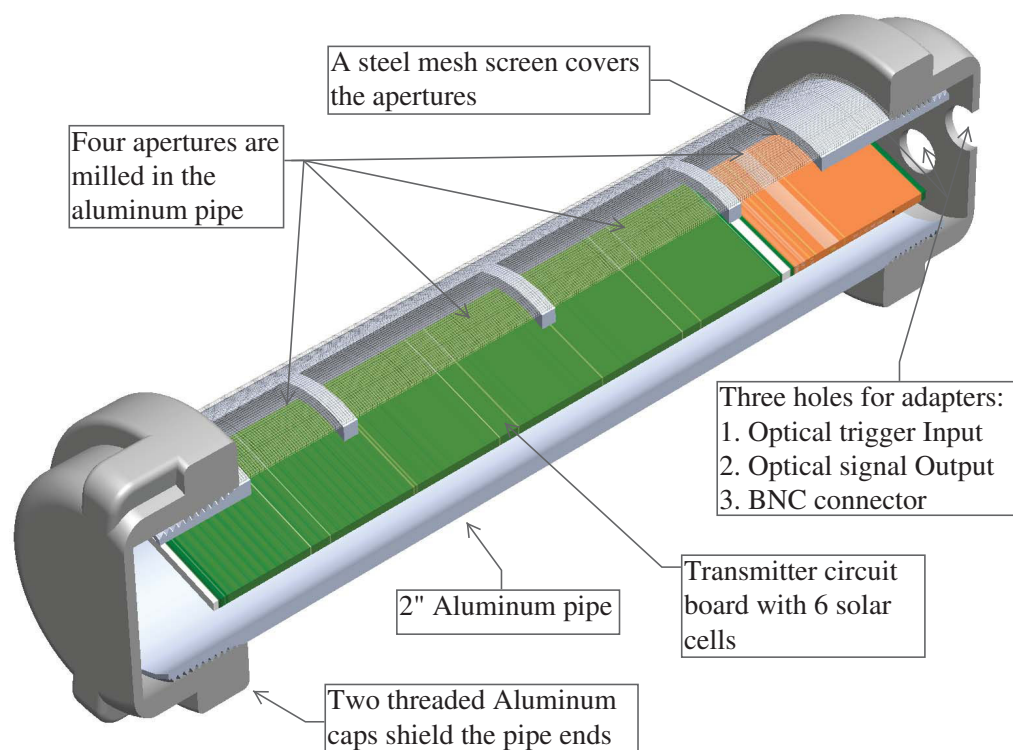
Three dimensional cross-section drawing of the transmitter without HV capacitor C2.
